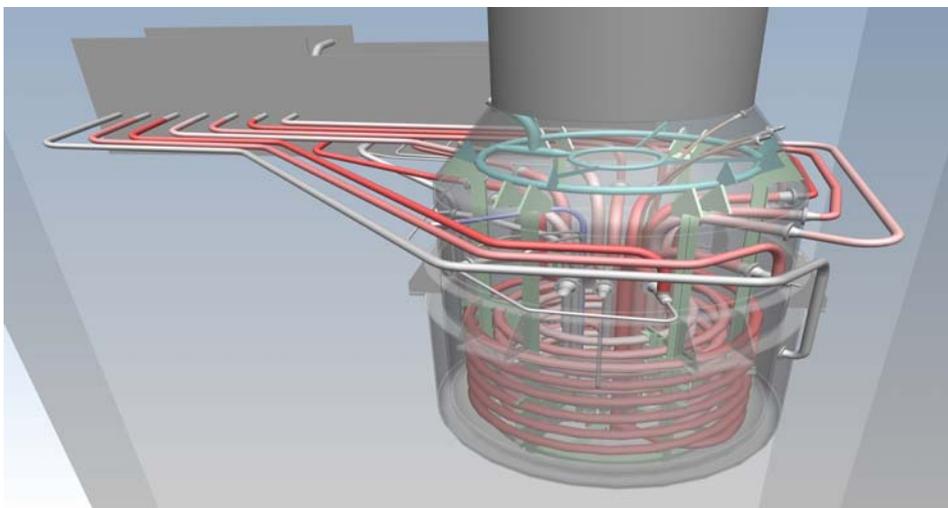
3D CAD model of HA Evaporator C steam heated coils and jacket
